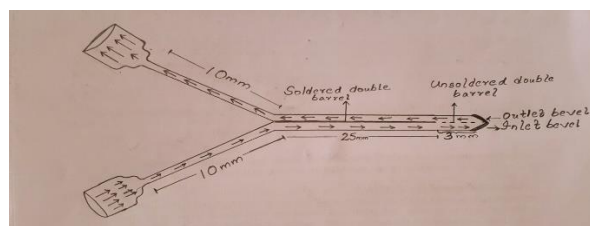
Soldering technique to maintain the accuracy of the exact needle tip and bevel.
